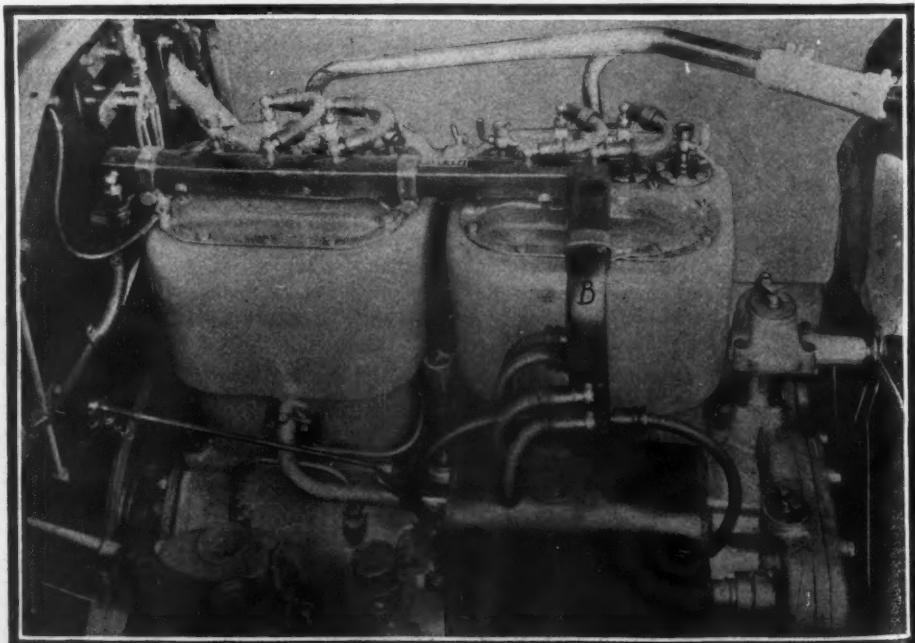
MAGNETO SIDE ON PEERLESS TOWN CAR CHASSIS
